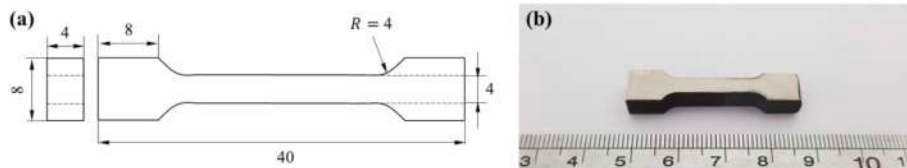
a) Geometry (mm) and b) image of tensile sample.
